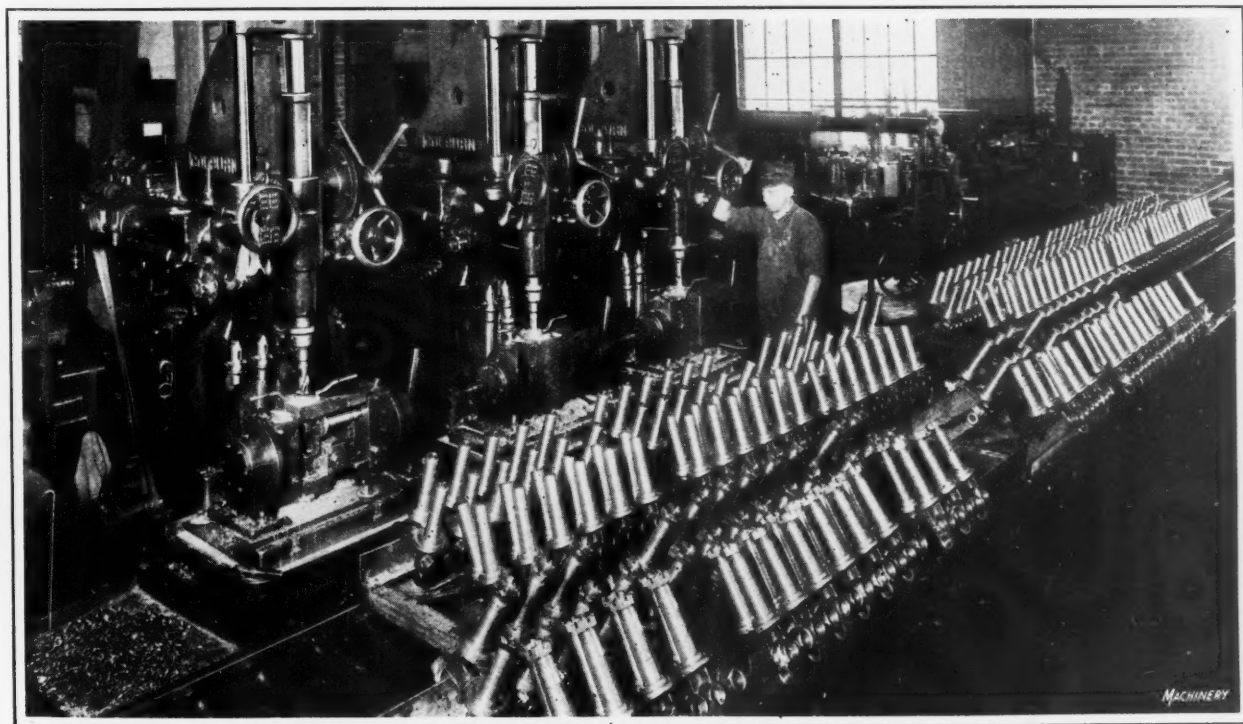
Some of the Machines used in finishing the Steering Knuckle Forgings
